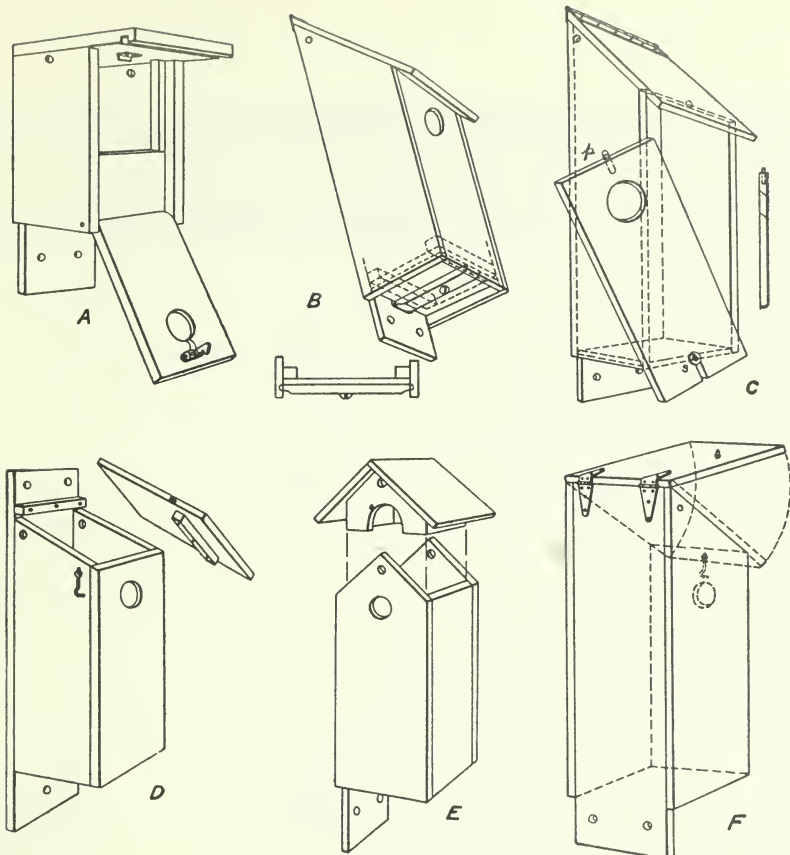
Accessible nest boxes: *A*, Hinged front held up by a catch; *B*, removable bottom, released by the slight turn of a cleat; *C*, swinging front, held in place by the pin *p* and by tightening the screw *s*; *D* and *E*, removable tops; *F*, hinged top.
